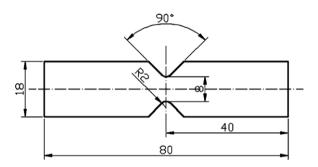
Geometry and dimensions of shear specimen (dimensions in millimeters).
